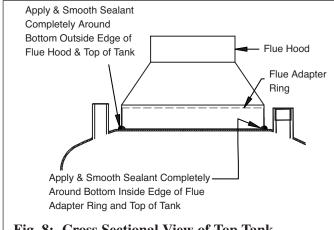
Cross Sectional View of Top Tank, Flue Adapter Ring and Flue Hood
